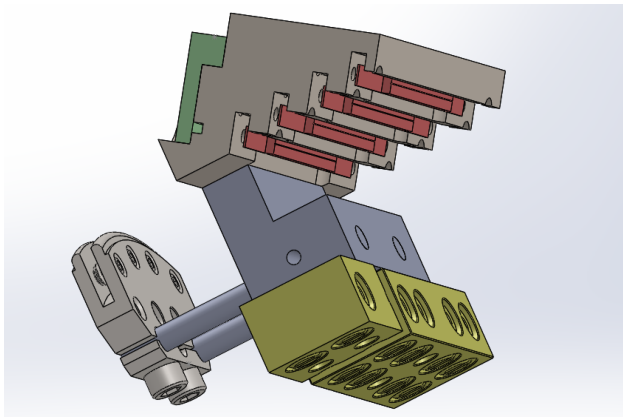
The Dispenser Assembly consists of the main Macor ceramic structure that hold the four Rubidium dispensers (red). Screw heads hold the dispenser ends in place and make electrical contact. One screw from each attaches to the common ground plate nut (green) while the other screw is attached to an individual wire. All five wires go to the PEEK terminal blocks (yellow). The whole assembly is held together by a steel adapter that attaches to a groove grabber mounting system.
